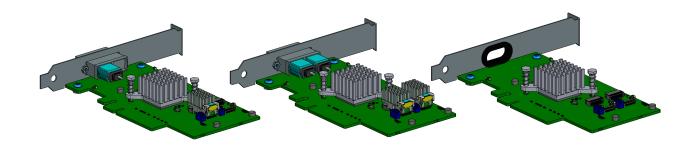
ADPT-4P-X2G3-FF-X8G3-MTP dimensional drawings
